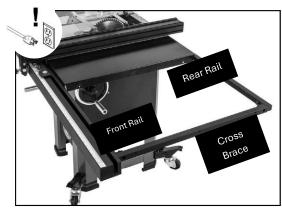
remove the front Rail, Back Rail and Cross Brace.
